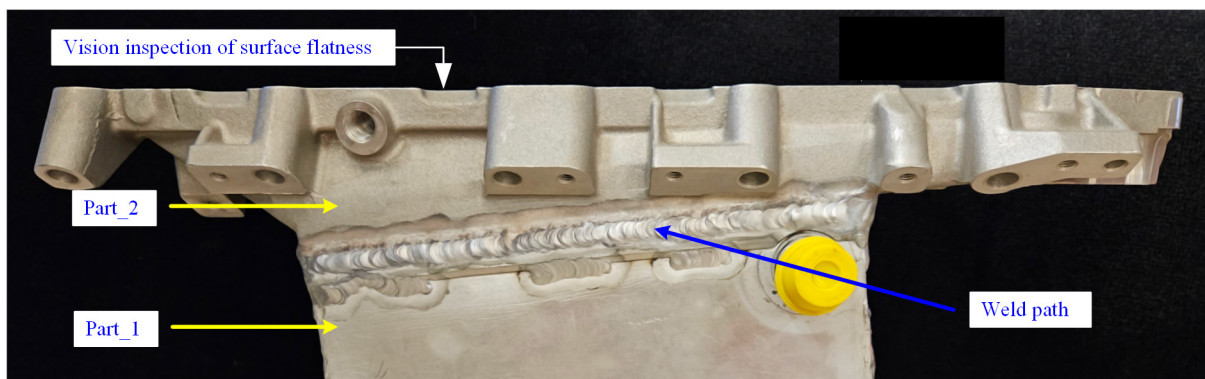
Aluminum body welded from two parts subjected to 3D imaging
